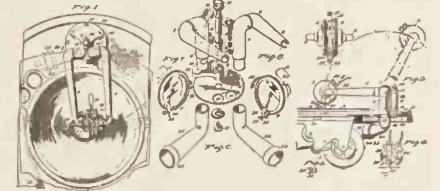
; and Fig. 6 is a detail sectional view of a modified form of bearing for the tone arm.
